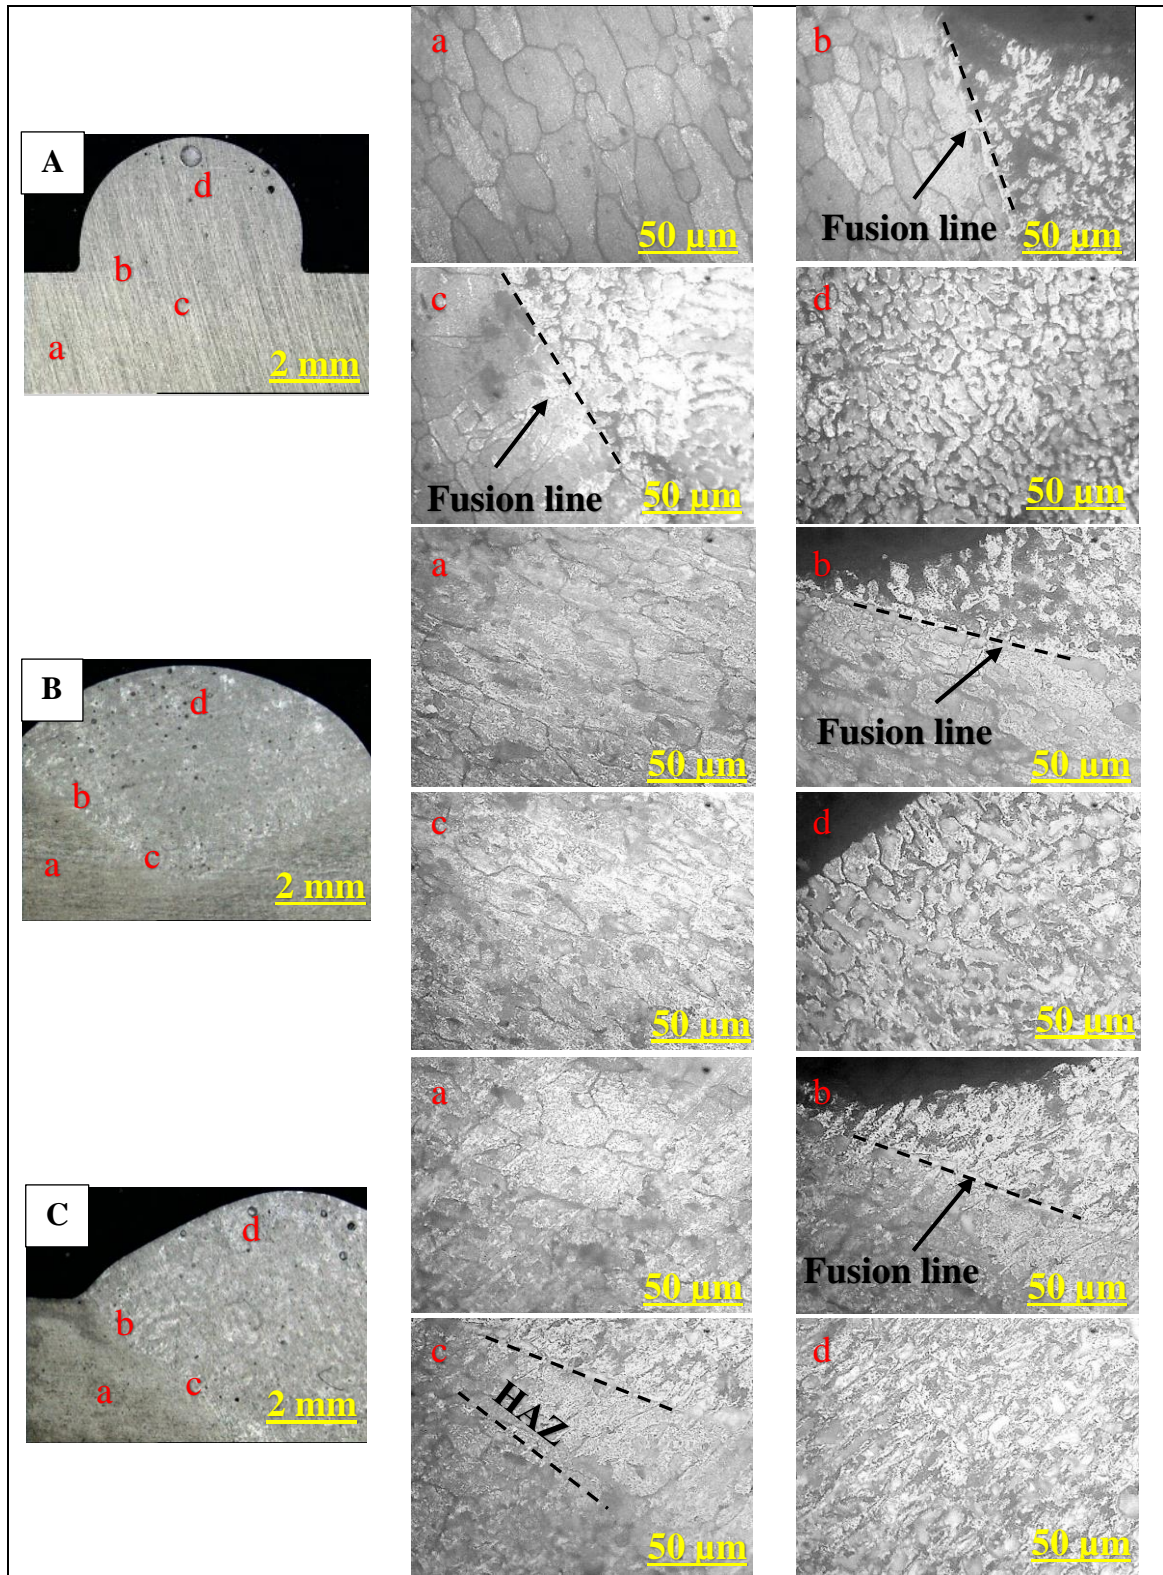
Variation in macro-images of bead geometry for different welding techniques (CMT, MIGP and MIG M) at constant current (100A) and welding speed (13.5mm/sec)
